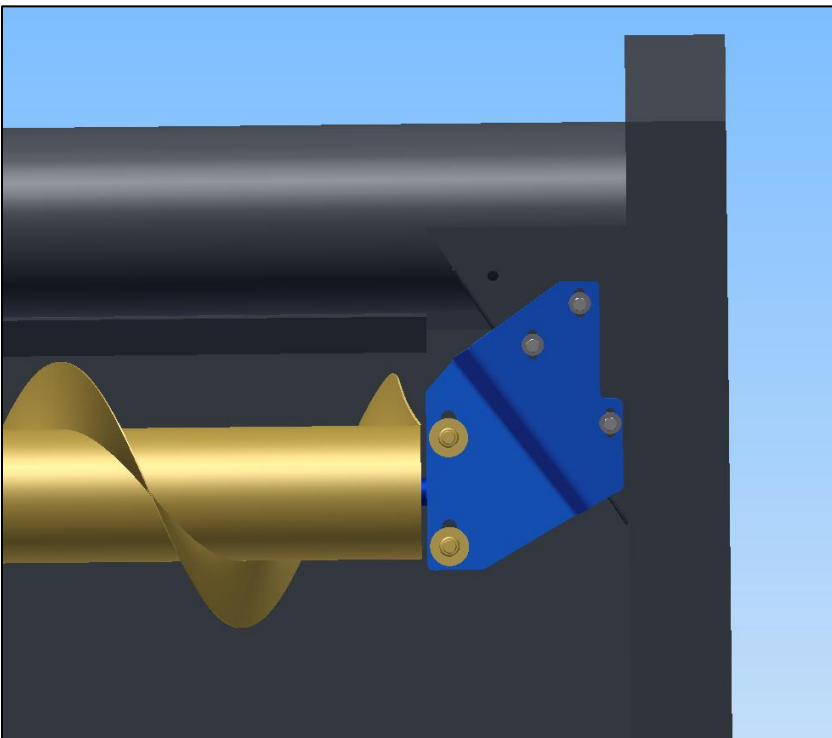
LEFT HAND END MOUNT (TOP VIEW)
